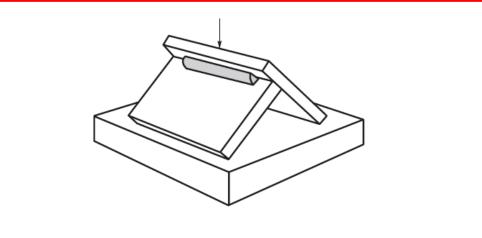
Method of Rupturing Specimen—Tack Welder Qualification
